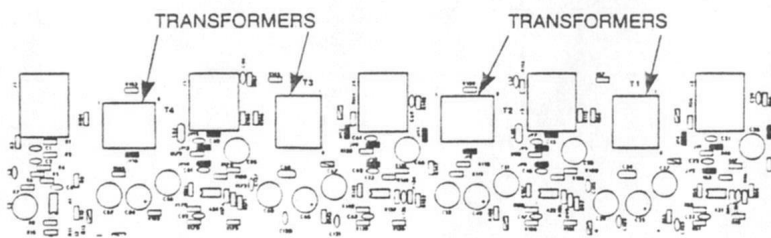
Transformer Mounting Locations (Jumpers to cut are shown as solid rectangles)
